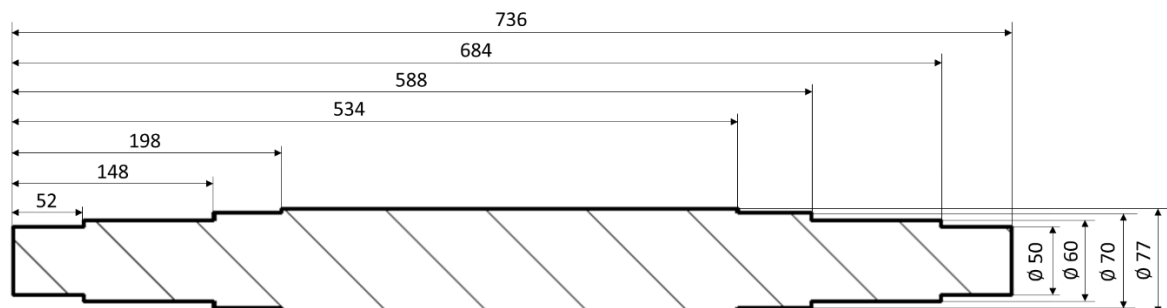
Initial design of the shaft of the sCO₂-4-NPP turbomachine
